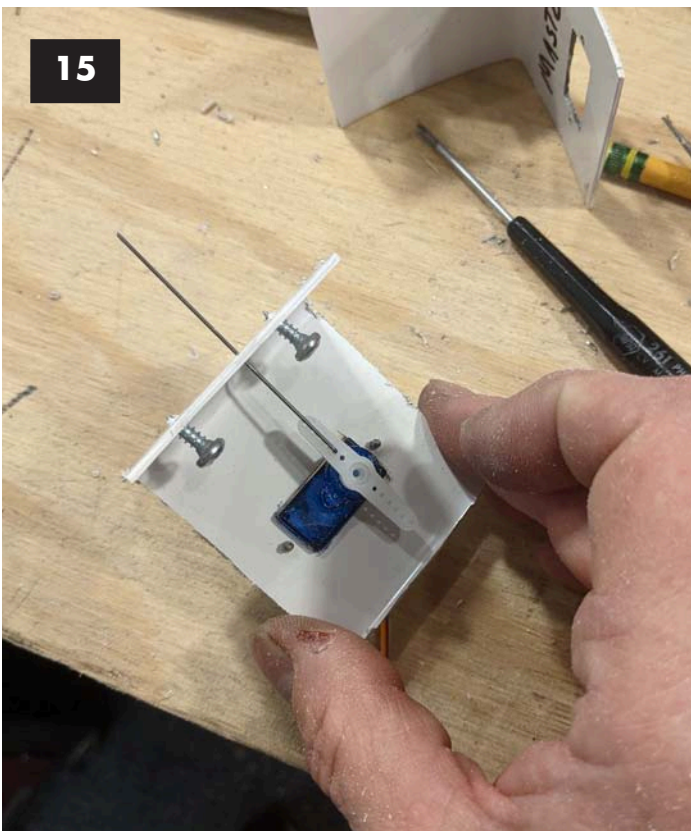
Servo mounted in Bracket with Throw Wire and mounting screws, ready to be installed.
